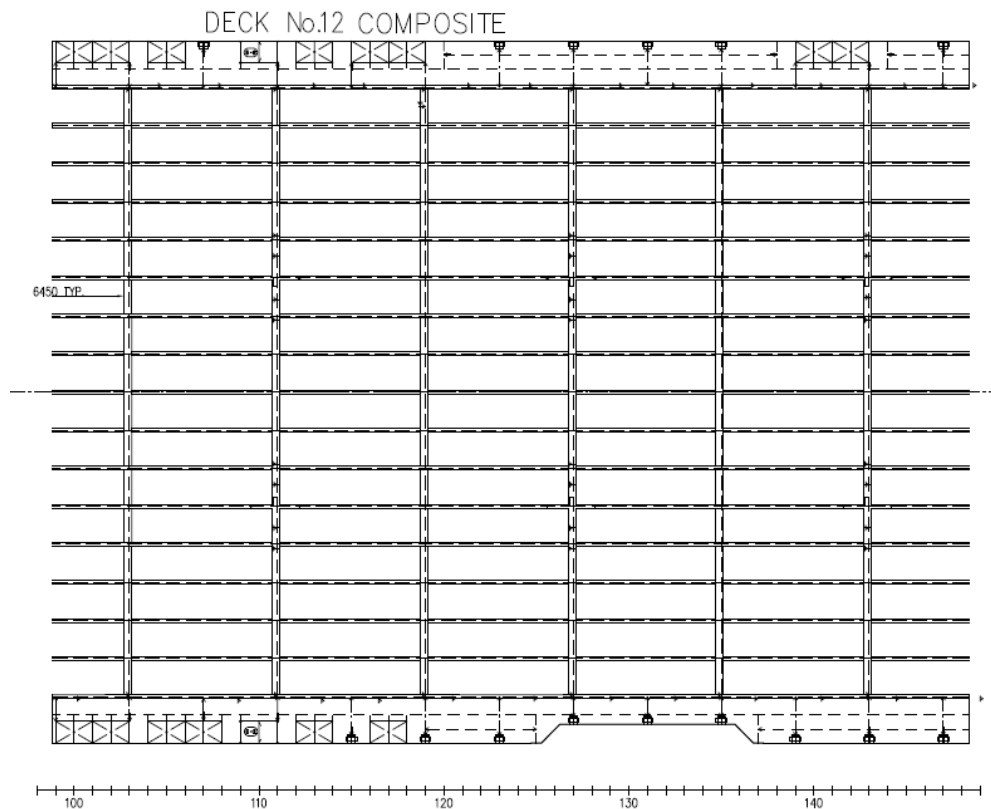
Design alternative 1 – steel structure arrangement – Deck top view
